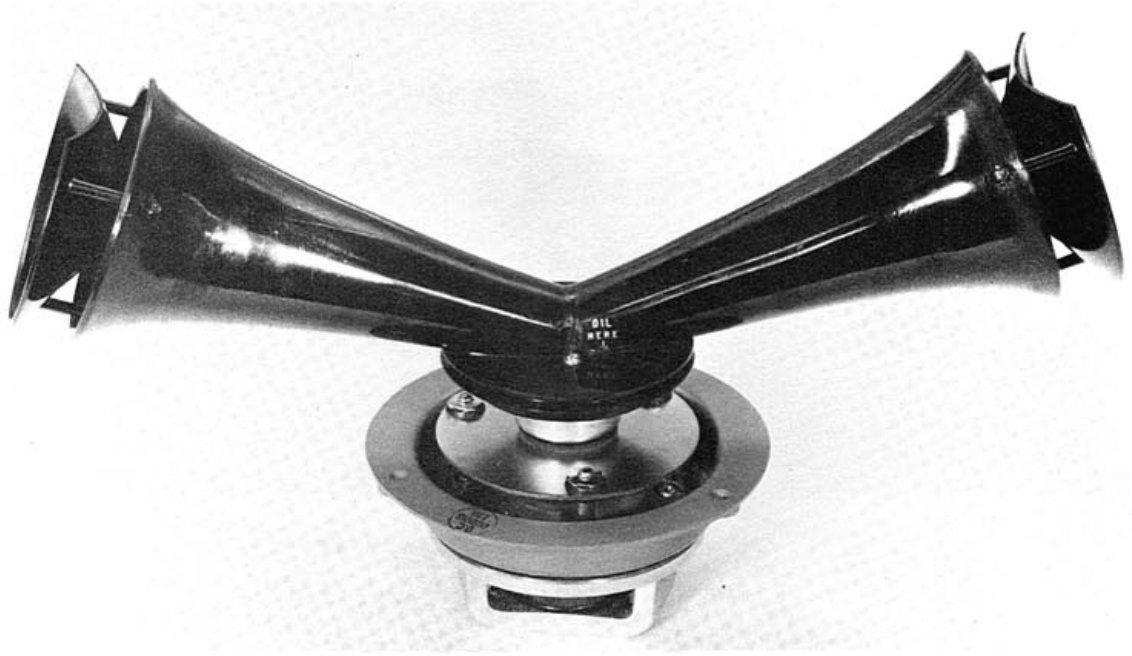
Treble Horn and Speaker, Assembled (Without Spacer Ring)
